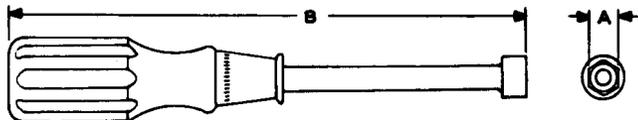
Screwdriver-Handle Hex, Socket Wrench
